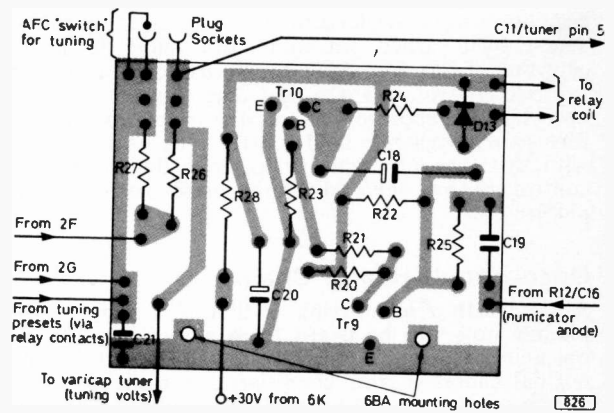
Printed board layout for the a.f.c. shorting circuit, viewed from the component side. Size $2\frac{1}{2} \times 2$ in.
